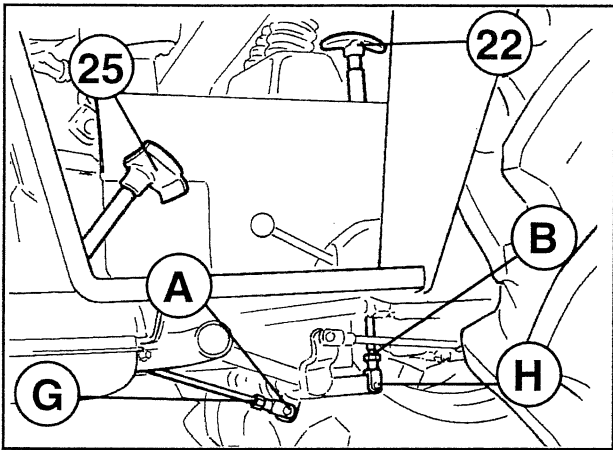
Adjusting the gearbox clutch pedal and PTO clutch lever stroke.
